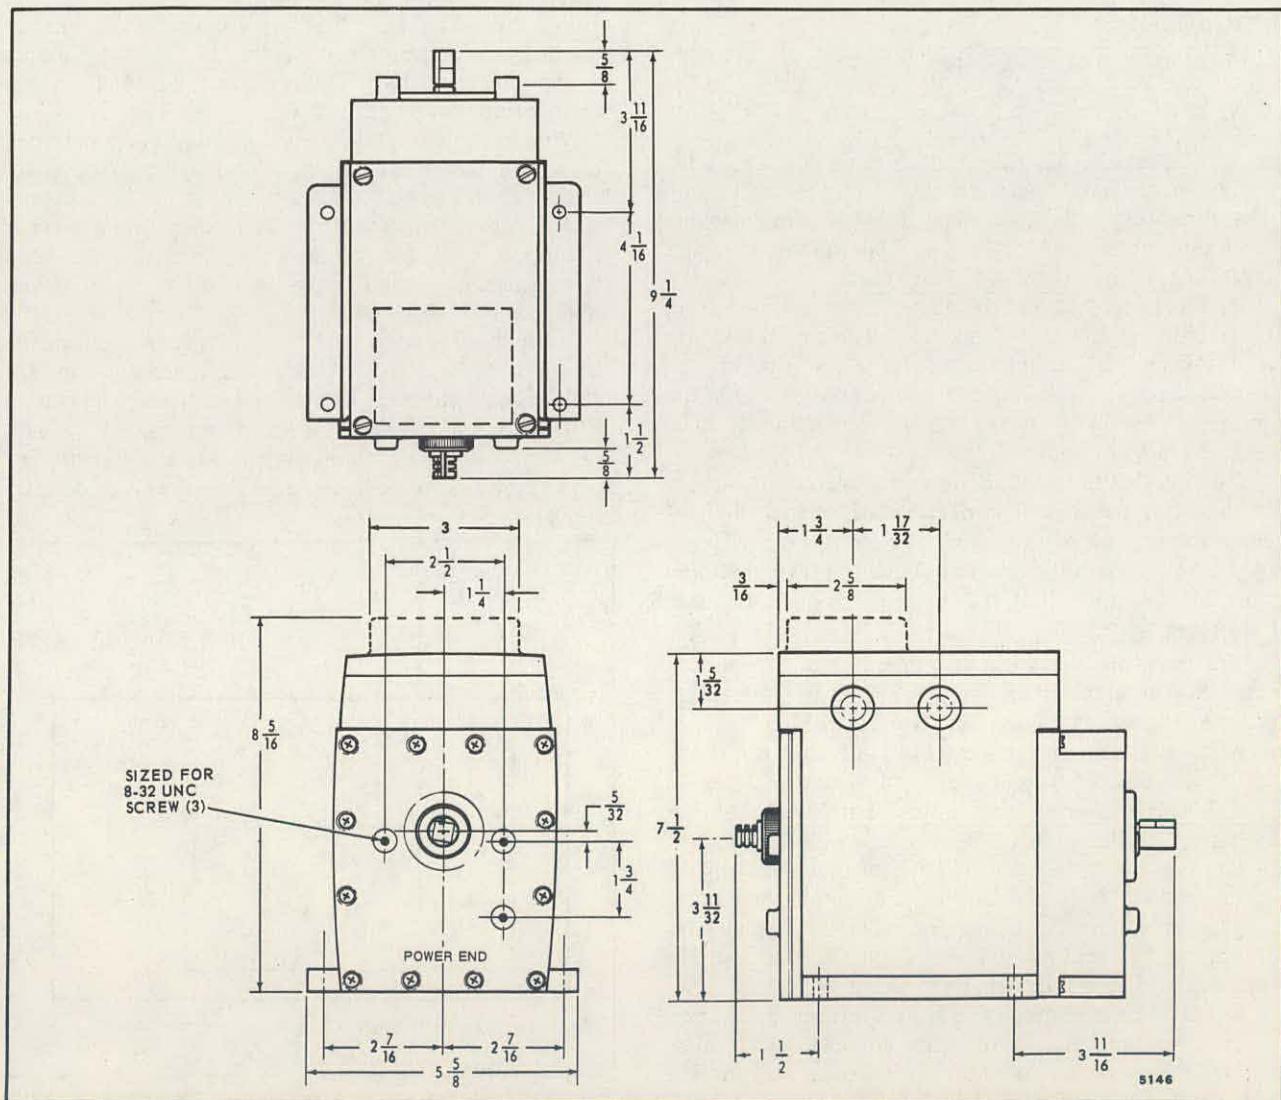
DIMENSIONS OF M445 AND M845 MOTORS (IN INCHES). BROKEN LINES SHOW ADDITION OF COVER MOUNTED TRANSFORMER.
